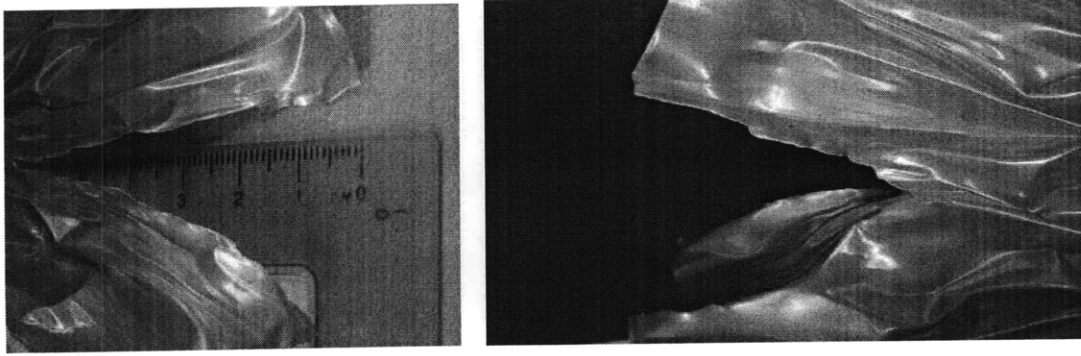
Two digital photographs of *Zig-Zag cracks* of the tubular aluminum alloy AA3004 workpiece that was tested in the preliminary EMFA experiments.
